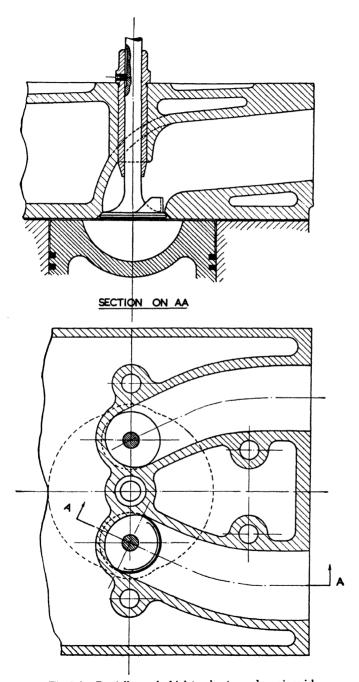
Partially masked inlet valve to produce air-swirl
